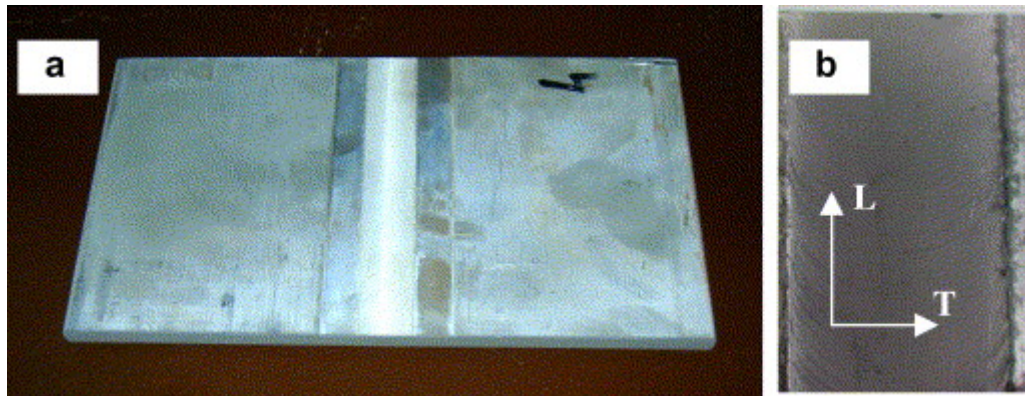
a) Butt weld of Al 6061/Al₂O₃/20p b) close-up of joint surface [20]
